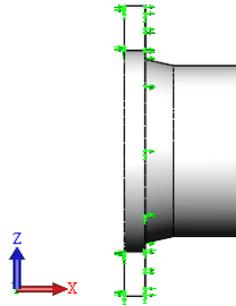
Add Figure of Standard Nozzle Core Fixture.
